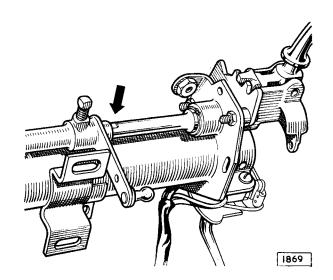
Align the flat on the end of the upper control shaft with the securing screw on the control lever.
